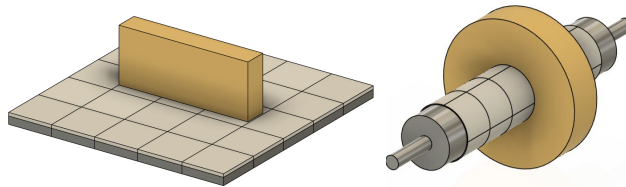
Transition from flat layer printing to cylindrical printing.
